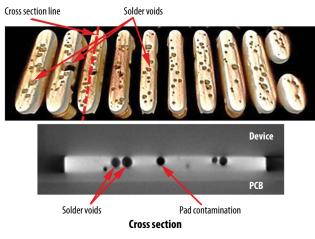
3D-X-ray of an eGaN FET showing excessive solder bump voids (top) Contaminant on the pad to solder interface leads to voids formation (bottom).
